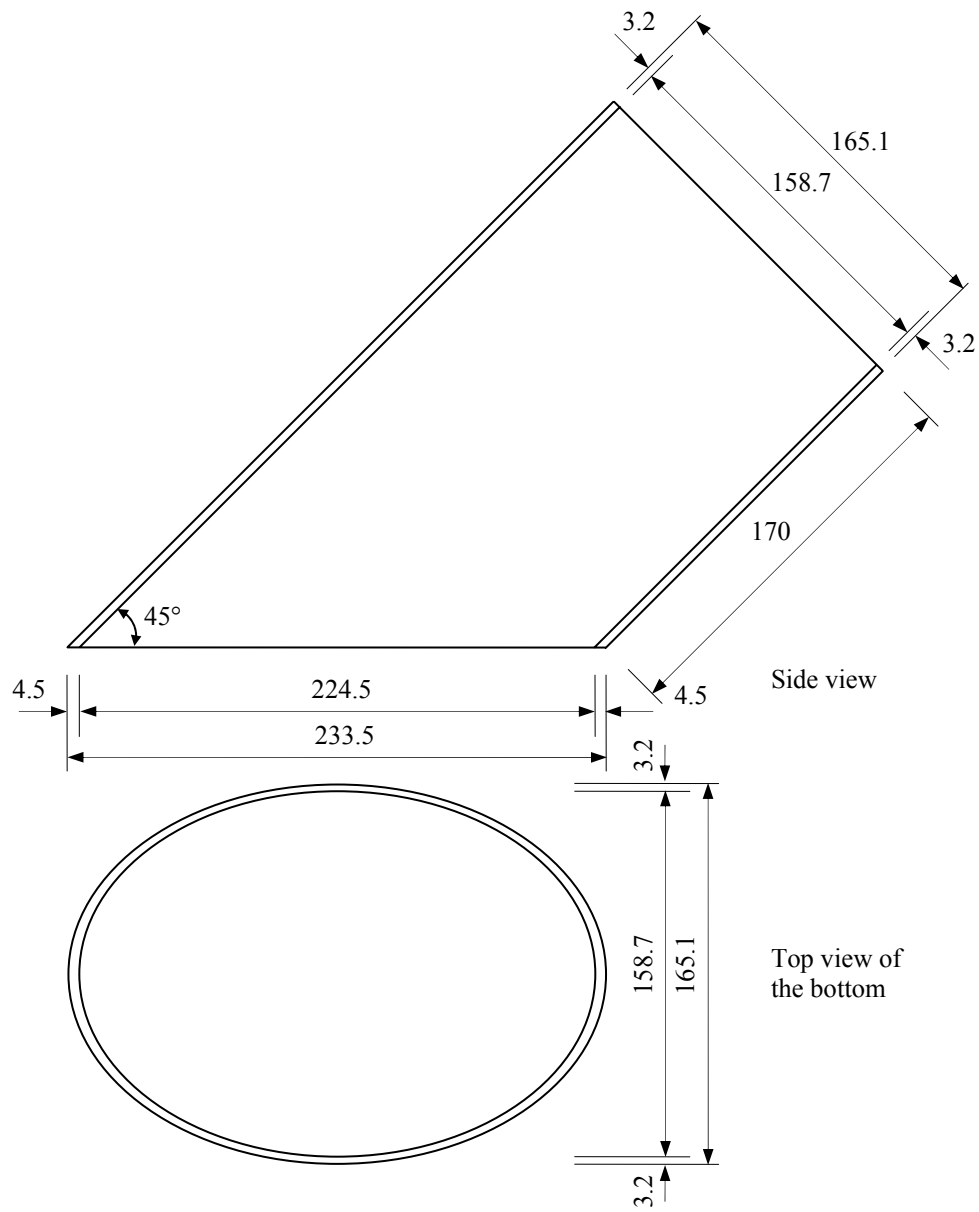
Dimensions of the feed shoe tube (in mm)
